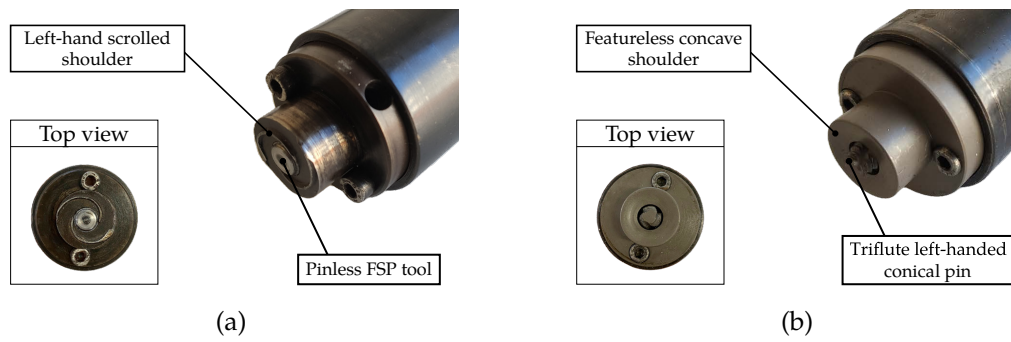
FSP tools: pinless tool (a); pinned tool (b)
